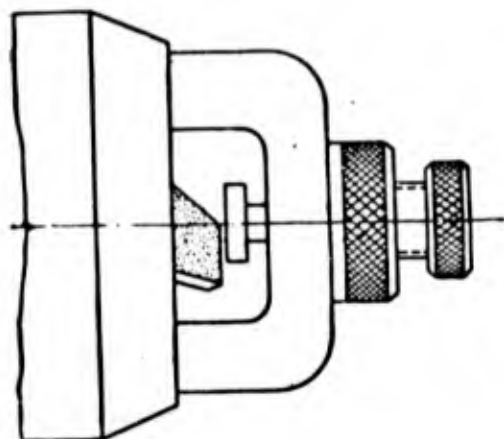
Magnetic Hold for Inserting Teeth into Bodies of End Mills
